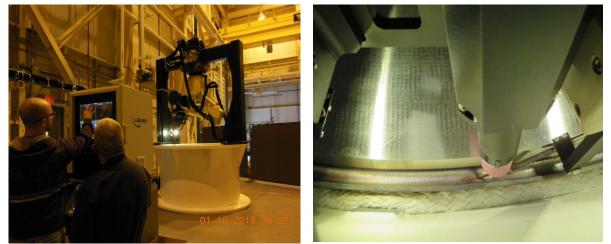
and Fig. 11. Welder in use on mockup of VSC and overpack. Close-up of overpack weld. Site/Facility Modifications
